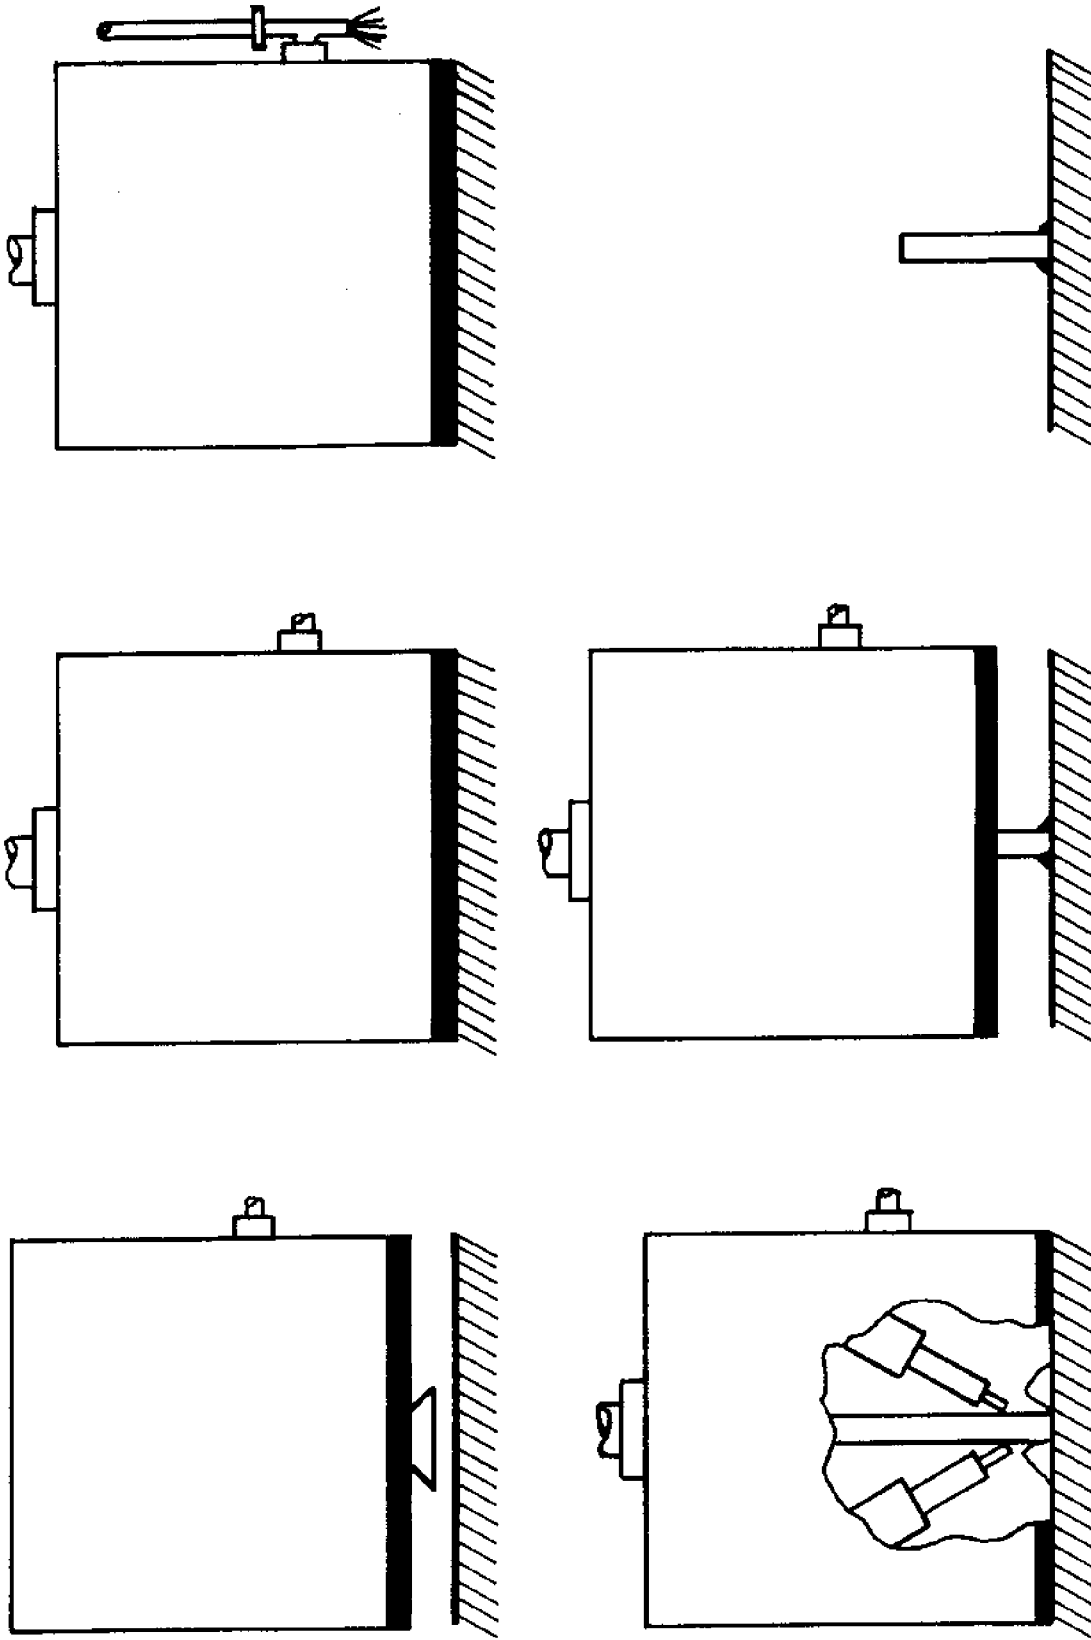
Welding procedure sequence of automatic underwater welding machine
